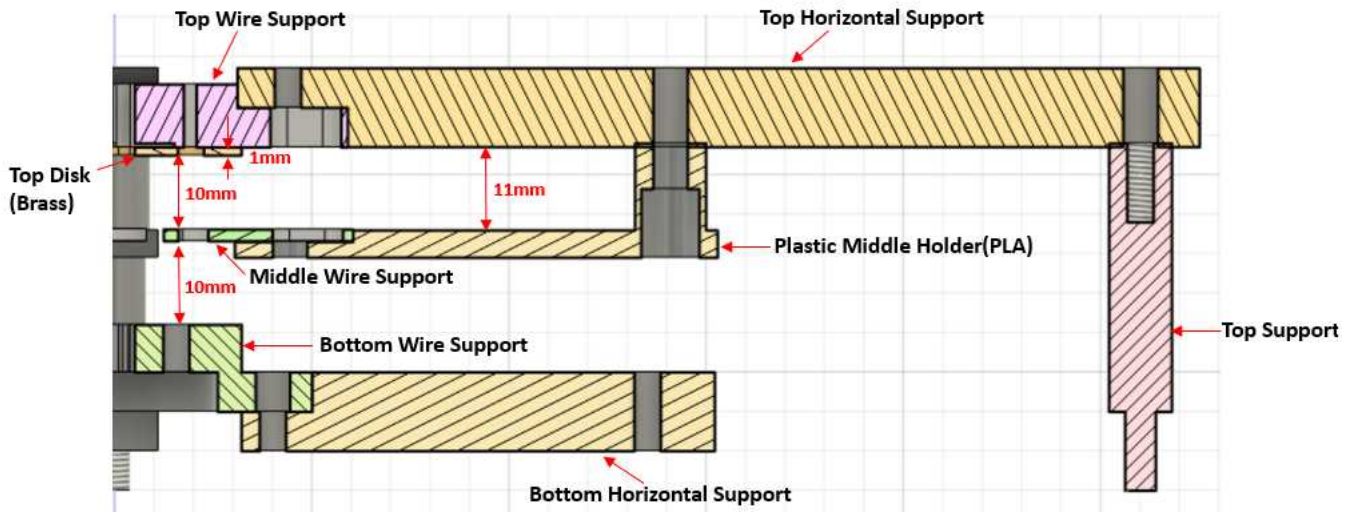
The CAD drawing cross-section of the bi-conical-wire array structure.
